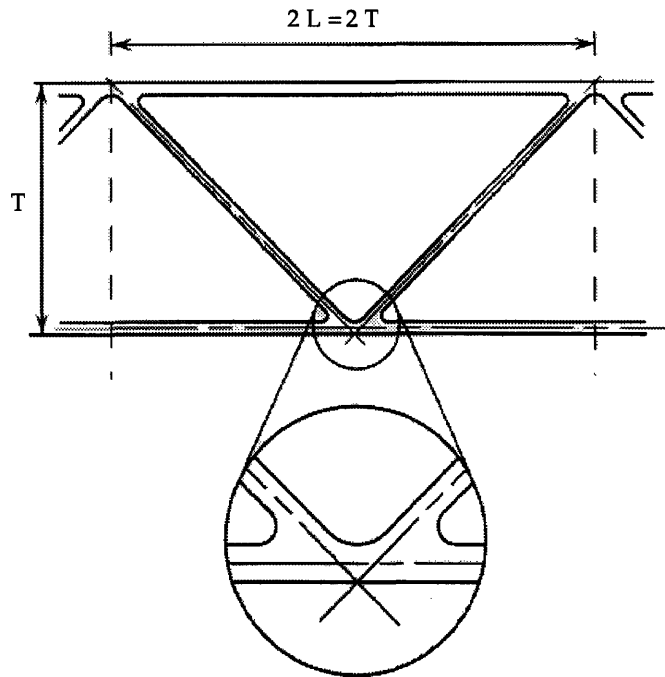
An approximate truss can extend the center-to-center distance between trussholes without increasing the overall panel thickness or the truss angle. In this figure, the truss segment midlines intersect at the outer edge of the wall segment.
